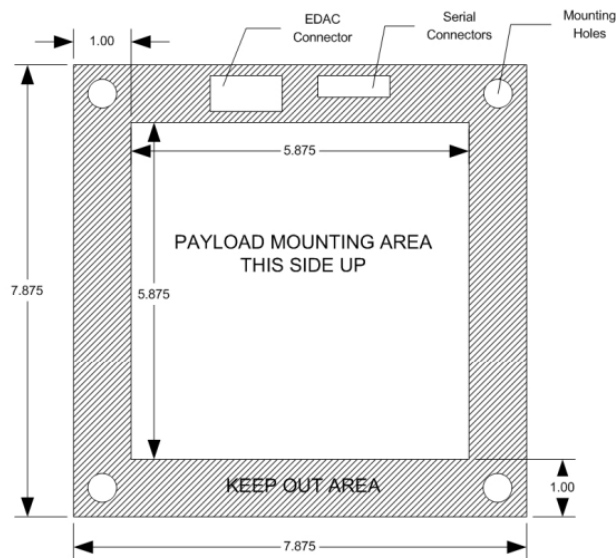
Small payload mechanical interface plate. All dimensions are in inches
